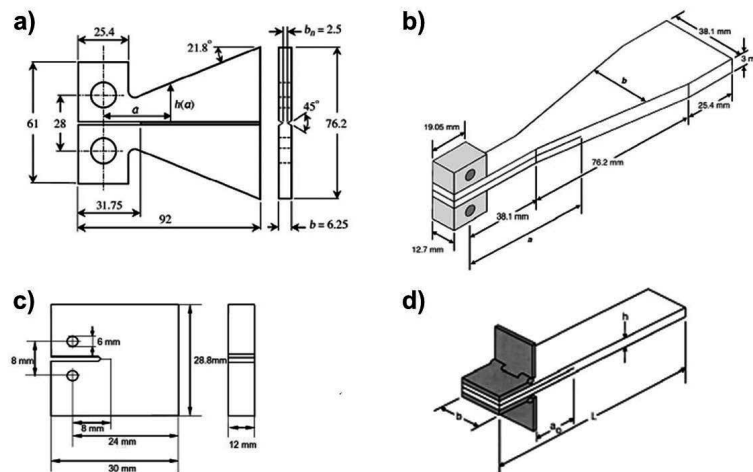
Specimen geometries for mode I testing: a) TDCB [62], b) WTDCB [63], c) CT [64] and d) DCB [65].
